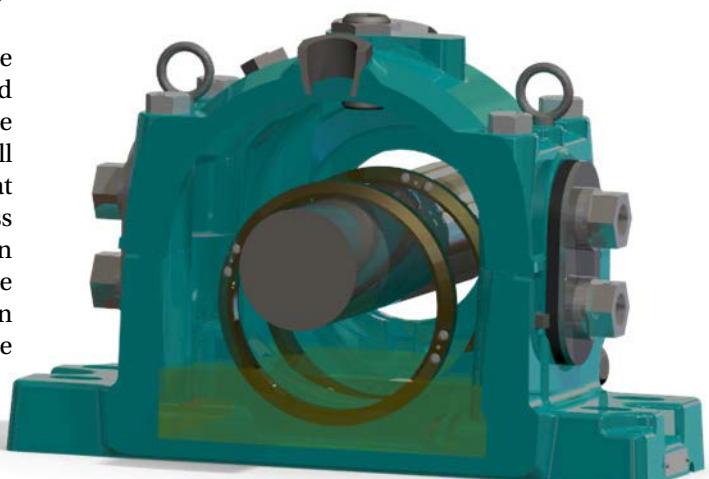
Oil rings rely on shaft rotation to deliver oil to the bearing.
